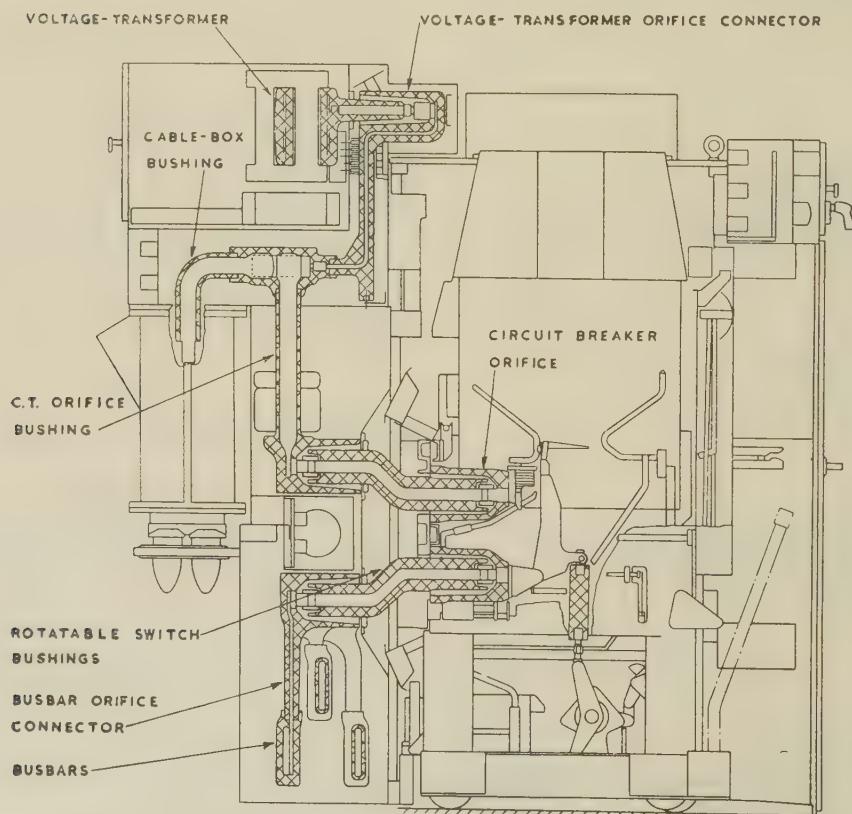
Indoor air-break switchgear unit, 1600 amp 11 kV 500 MVA, showing resin parts.
